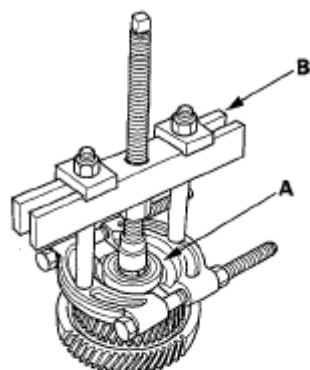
Identifying Carrier Bearings And Bearing Puller
